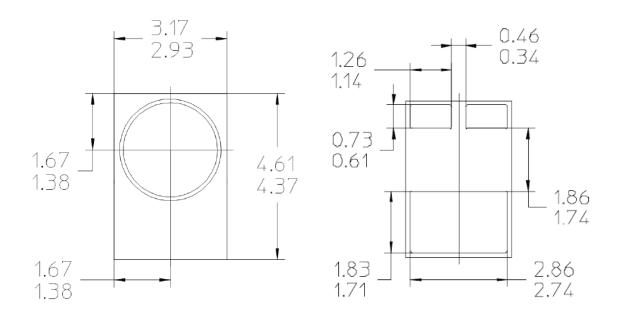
Mechanical dimensions of LUXEON Rebel package.
